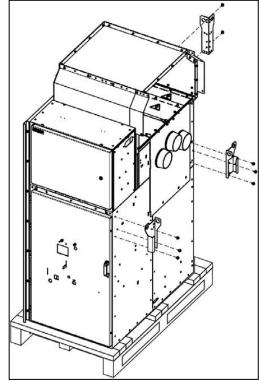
Example for a panel with end wall: 3 craning angles with 3 or 2 bolted joints M8x20 each
